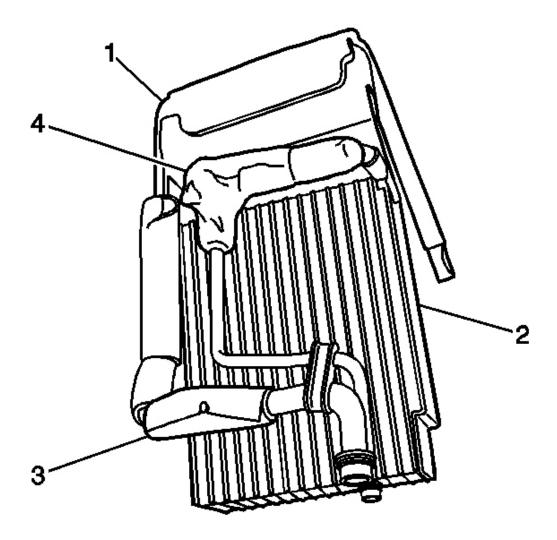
Removing/Installing Auxiliary Thermal Expansion Valve Courtesy of GENERAL MOTORS CORP.
